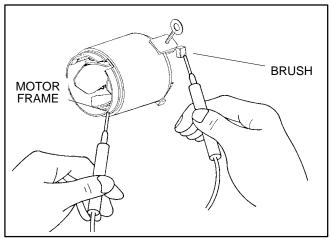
CHECKING MOTOR FRAME WIND-INGS
